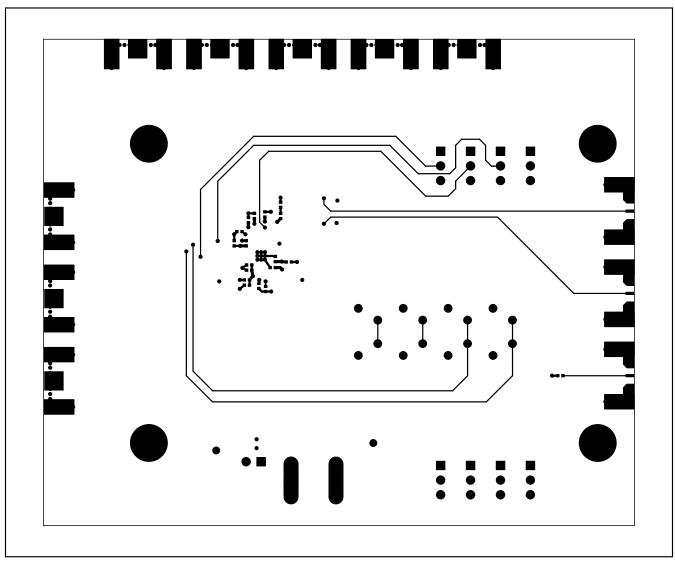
MAX3624 EV Kit Layout—Solder Plane
